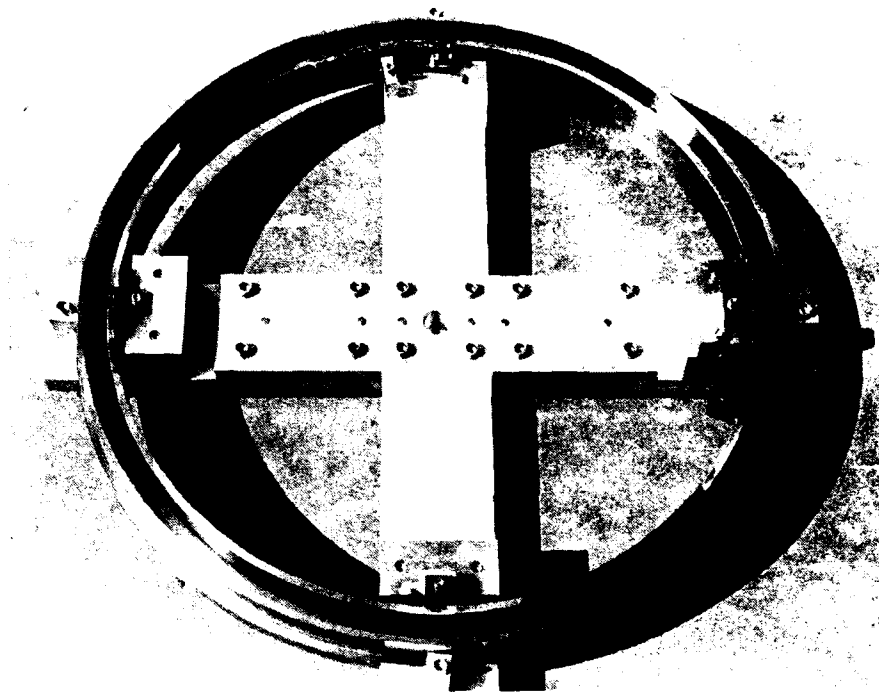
Welding fixture for titanium end-cap joint ring.
